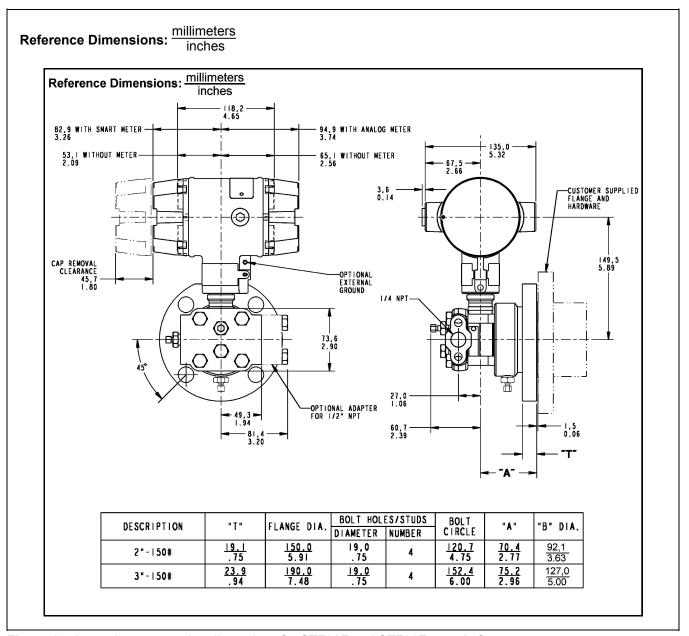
Approximate mounting dimensions for STF92F and STF93F pseudo flange type
